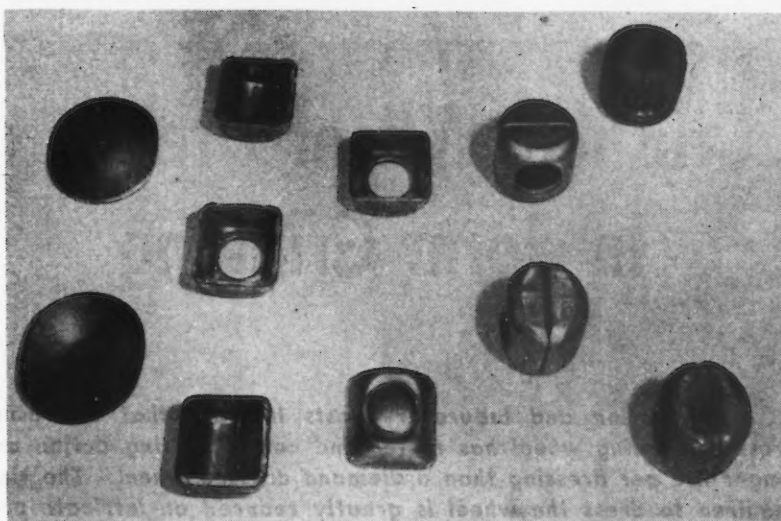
Steel parts for welded fragmentation bomb in various stages of manufacture. Completed unit is shown at upper right. The $\frac{1}{4}$ in. blanks are seen at the left.
